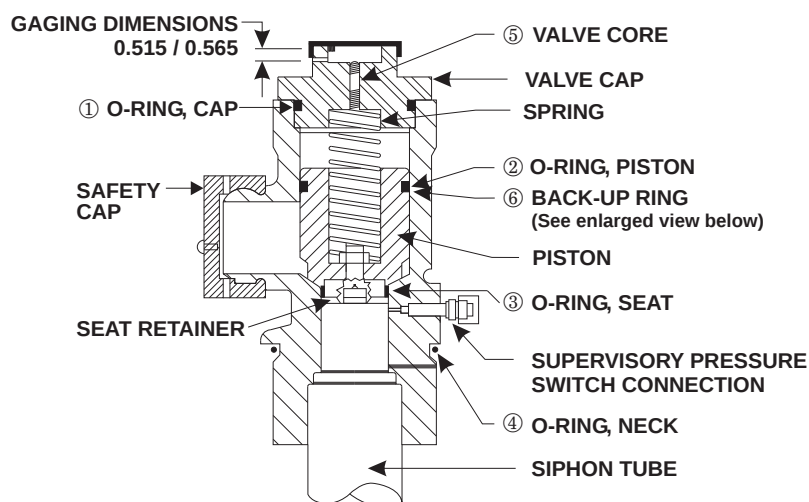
Valve Assembly (1½ in. and 2 in.)
